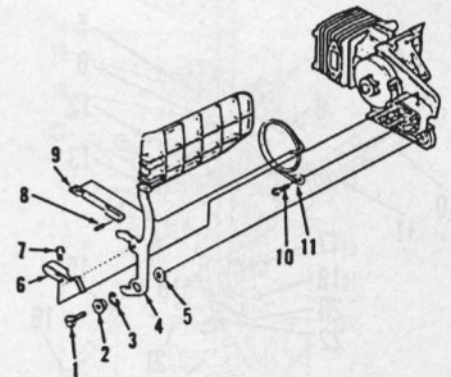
Exploded view of chain brake used on Models 240SL and 245SL.
